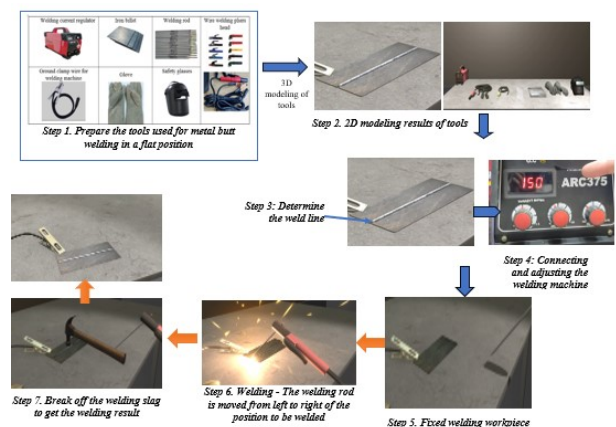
Diagram detailing the steps of the metal butt welding process in the flat position from the start to the result of the butt welded metal plate.
